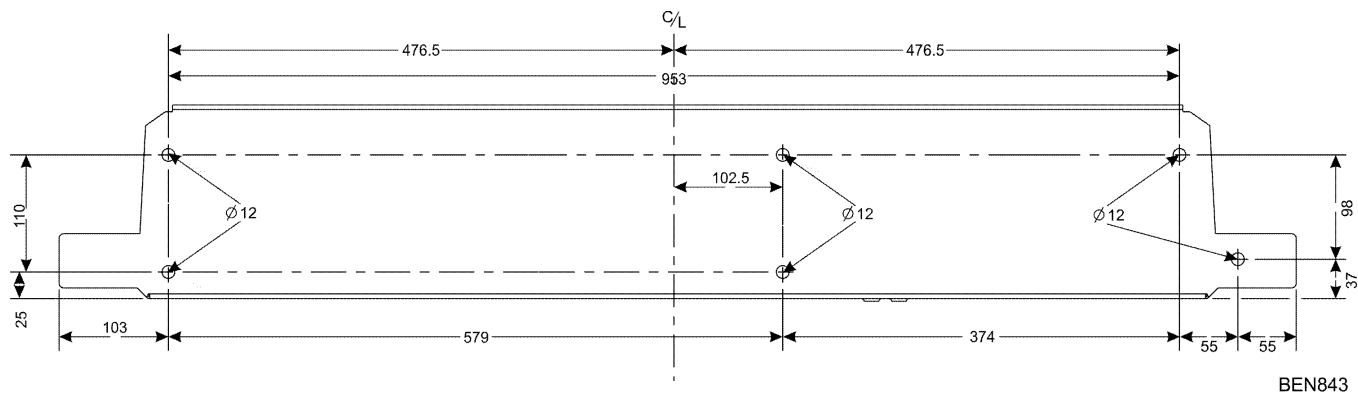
Condenser Roof Top Mounting/Access Hole Locations Shown
